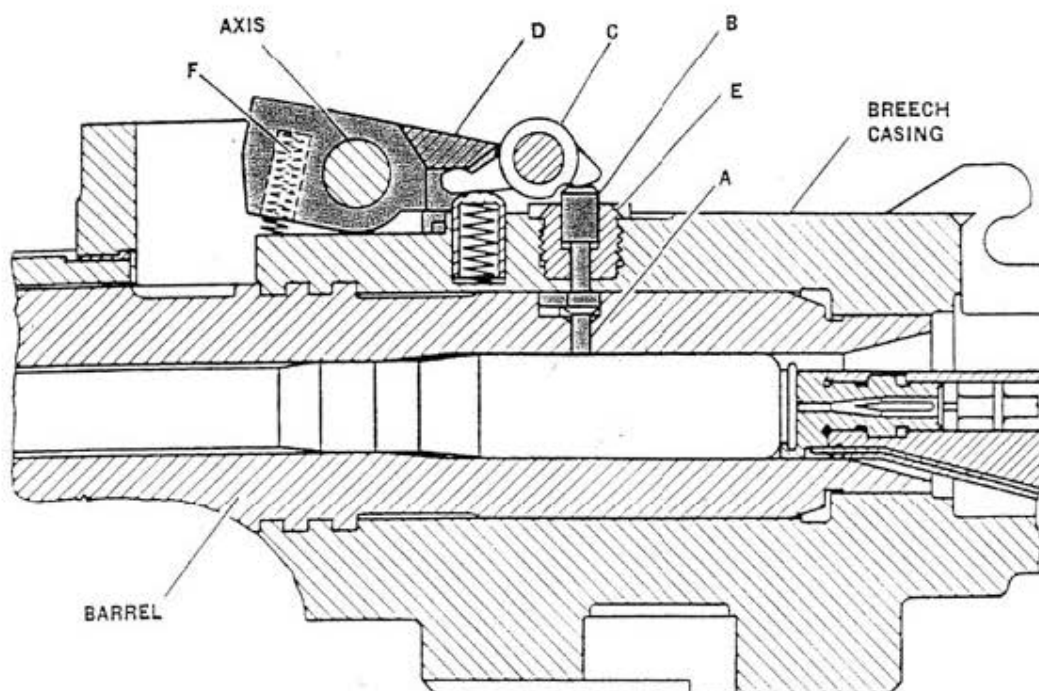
Double Loading Stop Gear. Gun has fired and cartridge is in firing chamber
